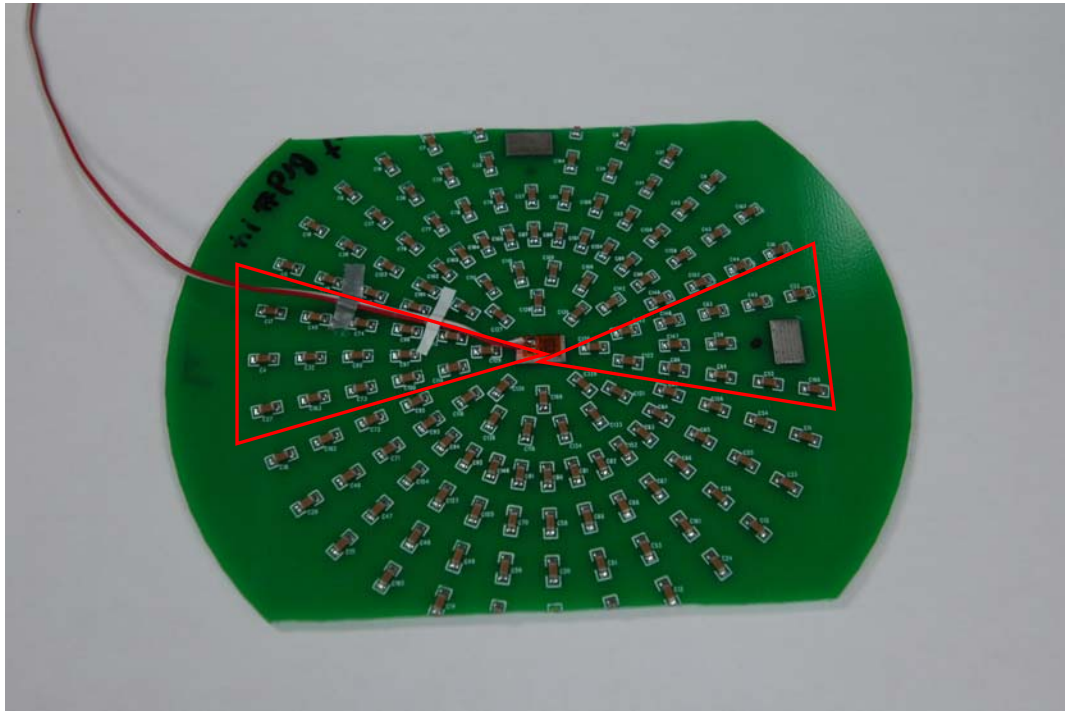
Circular board trimmed for use in standard 4-point bend test.
